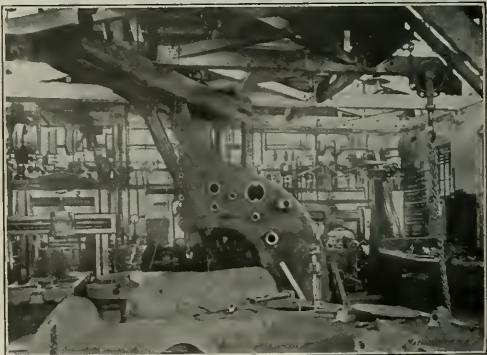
Frame of Car-wheel Borers under Gih Cranes. Radial Drilling Machine in Background at Work on Casting.
